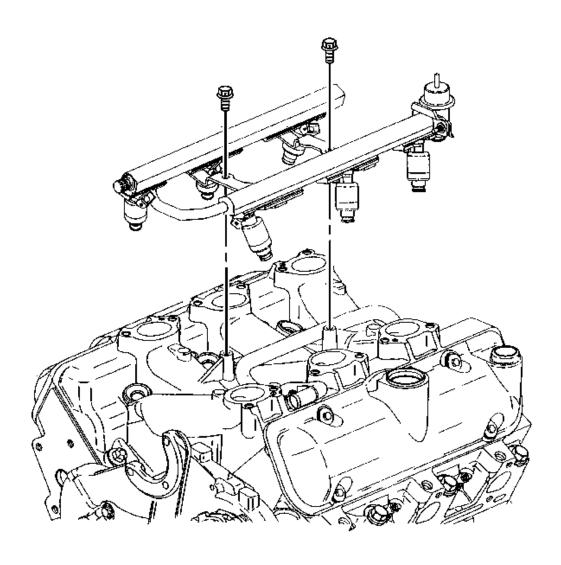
Removing Fuel Injector Rail Courtesy of GENERAL MOTORS CORP.
